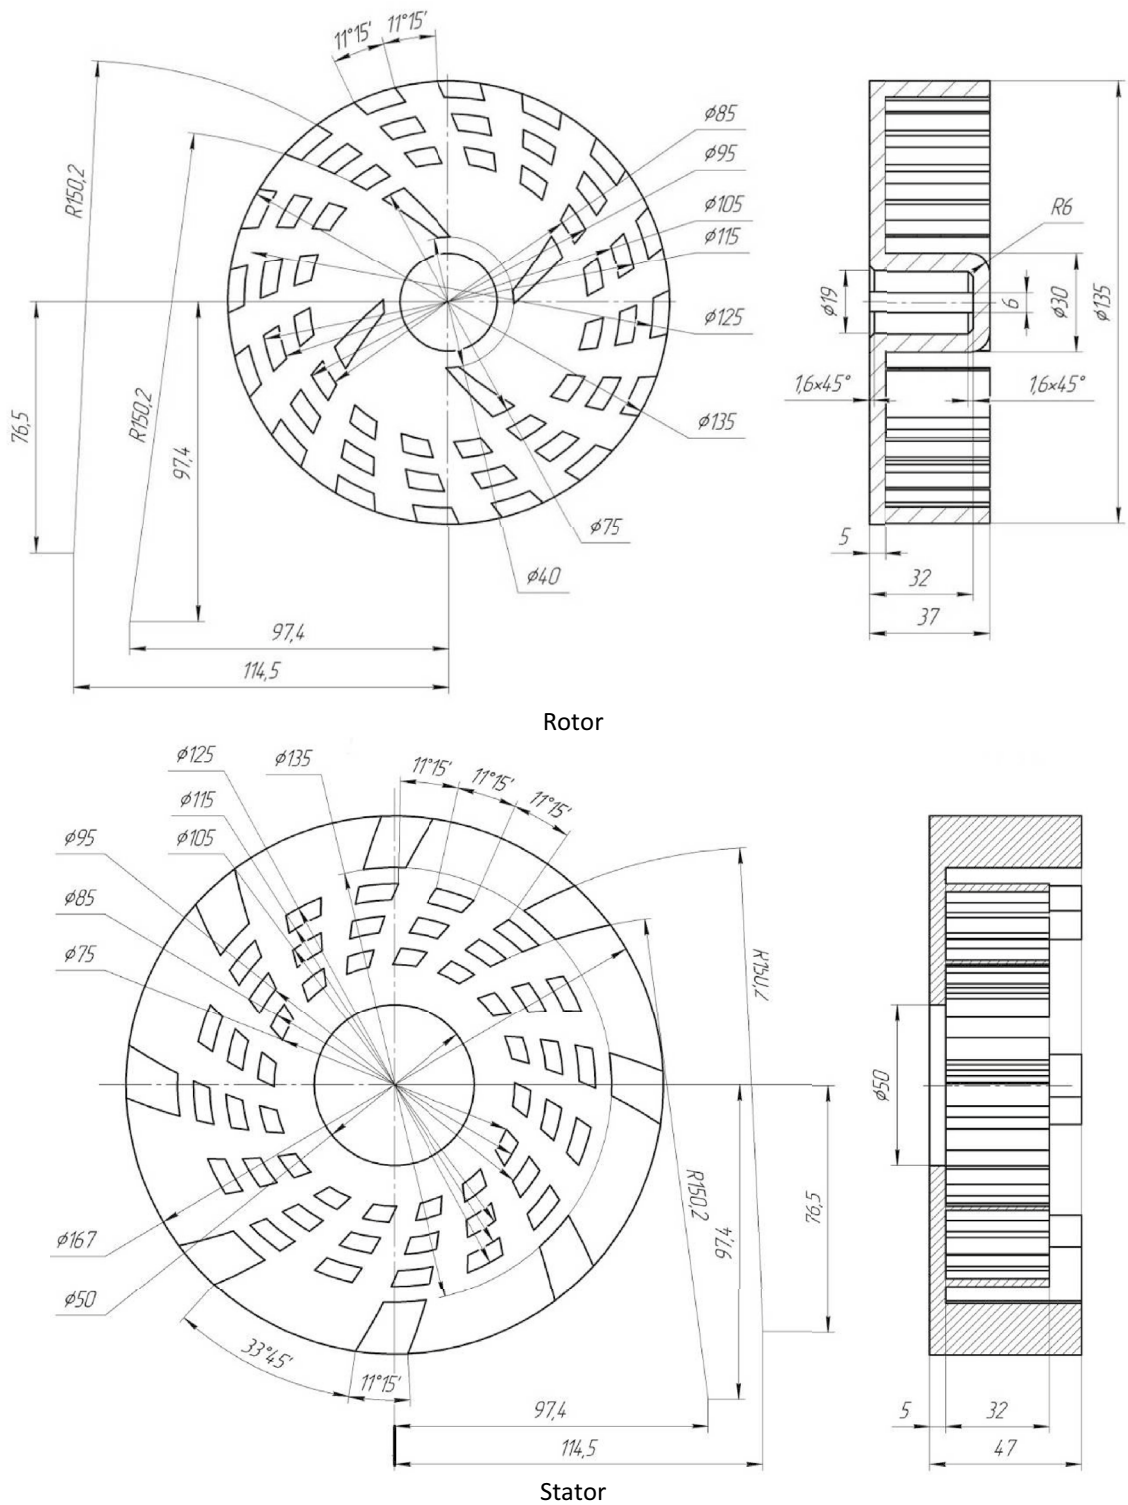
Geometric dimensions (mm) of the rotor and stator of the cavitation disperser-homogenizer^{19,20}.
